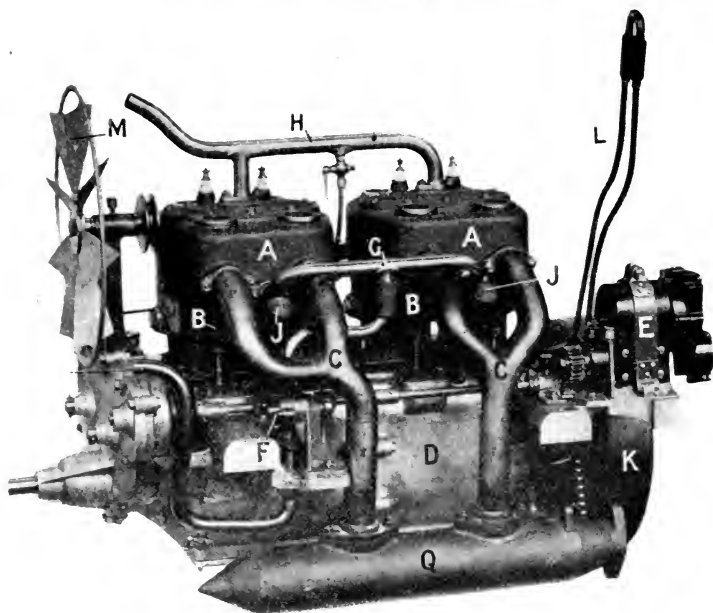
FOUR-CYLINDER ENGINE WITH MAGNETO IGNITION.
